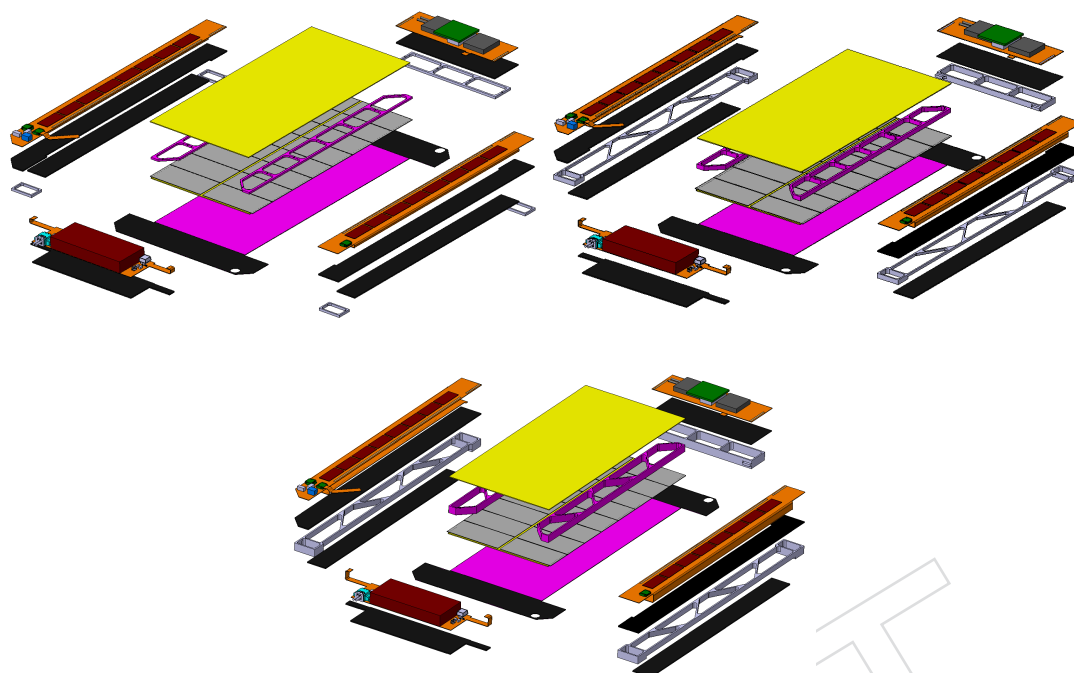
Exploded view of the 1.6 mm (top left), 2.6 mm (top right) and 4.0 mm (bottom) PS module variants FIXME: replace with fig with legend when available. .
